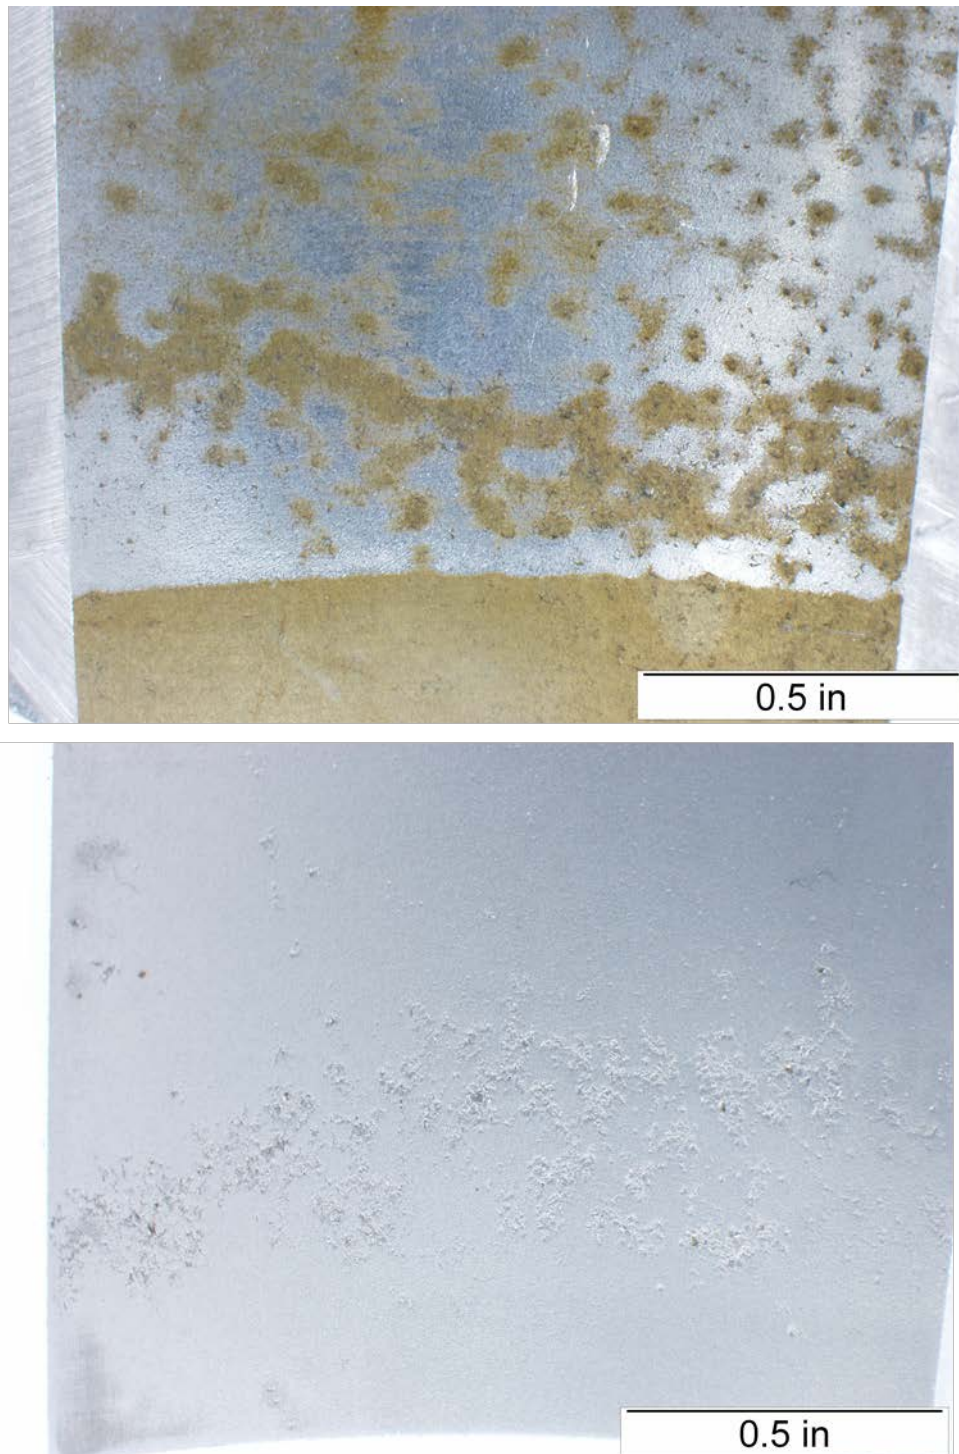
Adjacent bushing bore surfaces containing band of IGC. Top) No Alteration, anodize still present; Bottom) Surface after gentle glass blasting which removed surface coatings and enhanced visible indication of corrosion damage
